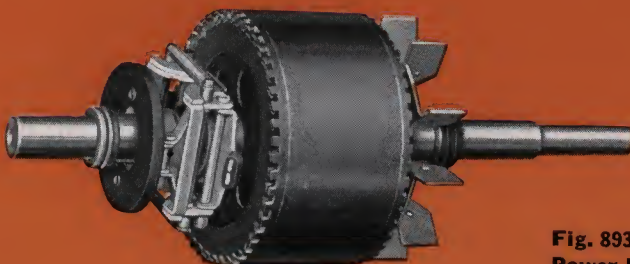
Illustrating 1/6 Horse Power Rotor.
